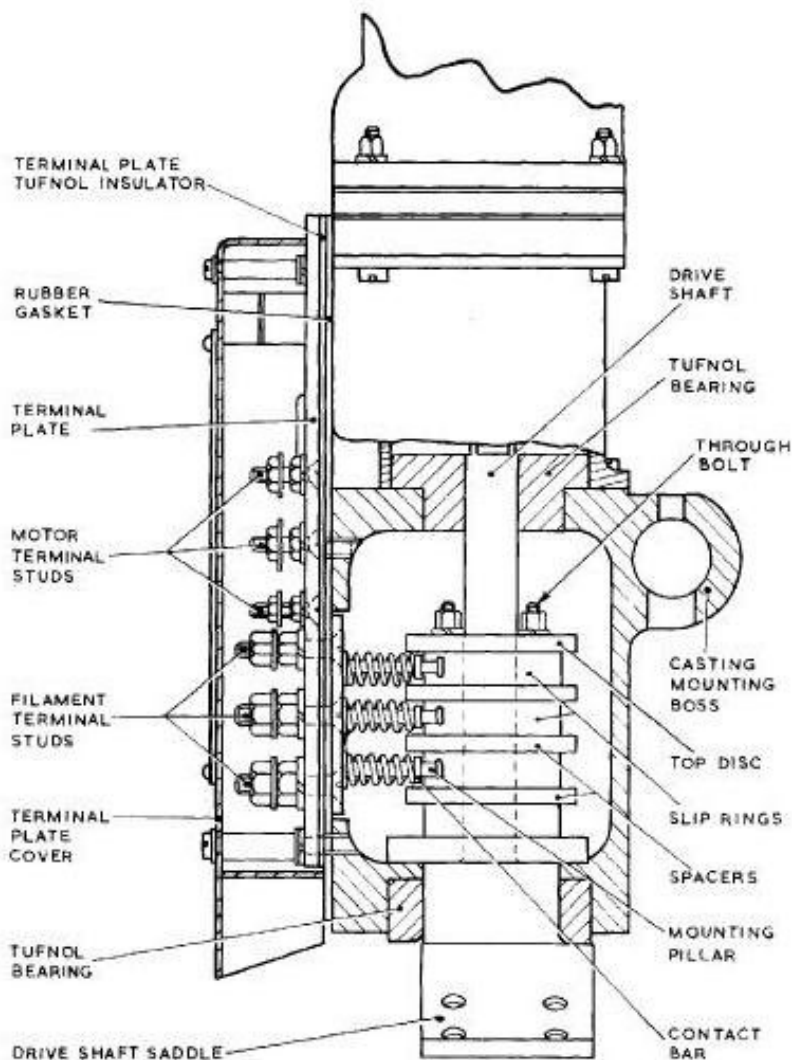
Part sectional view of column casting showing slip rings and contact bars
